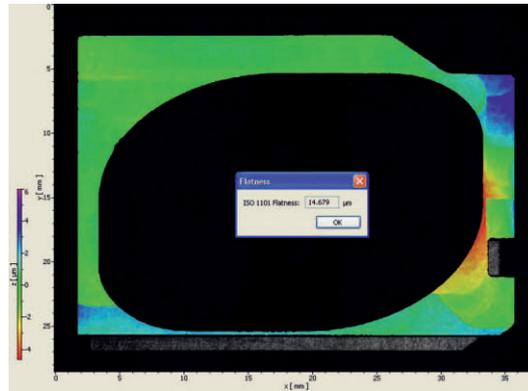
A good mirror holder shows a flatness measurement (<15 μm) that is within dimensional tolerances (ISO 1101).
